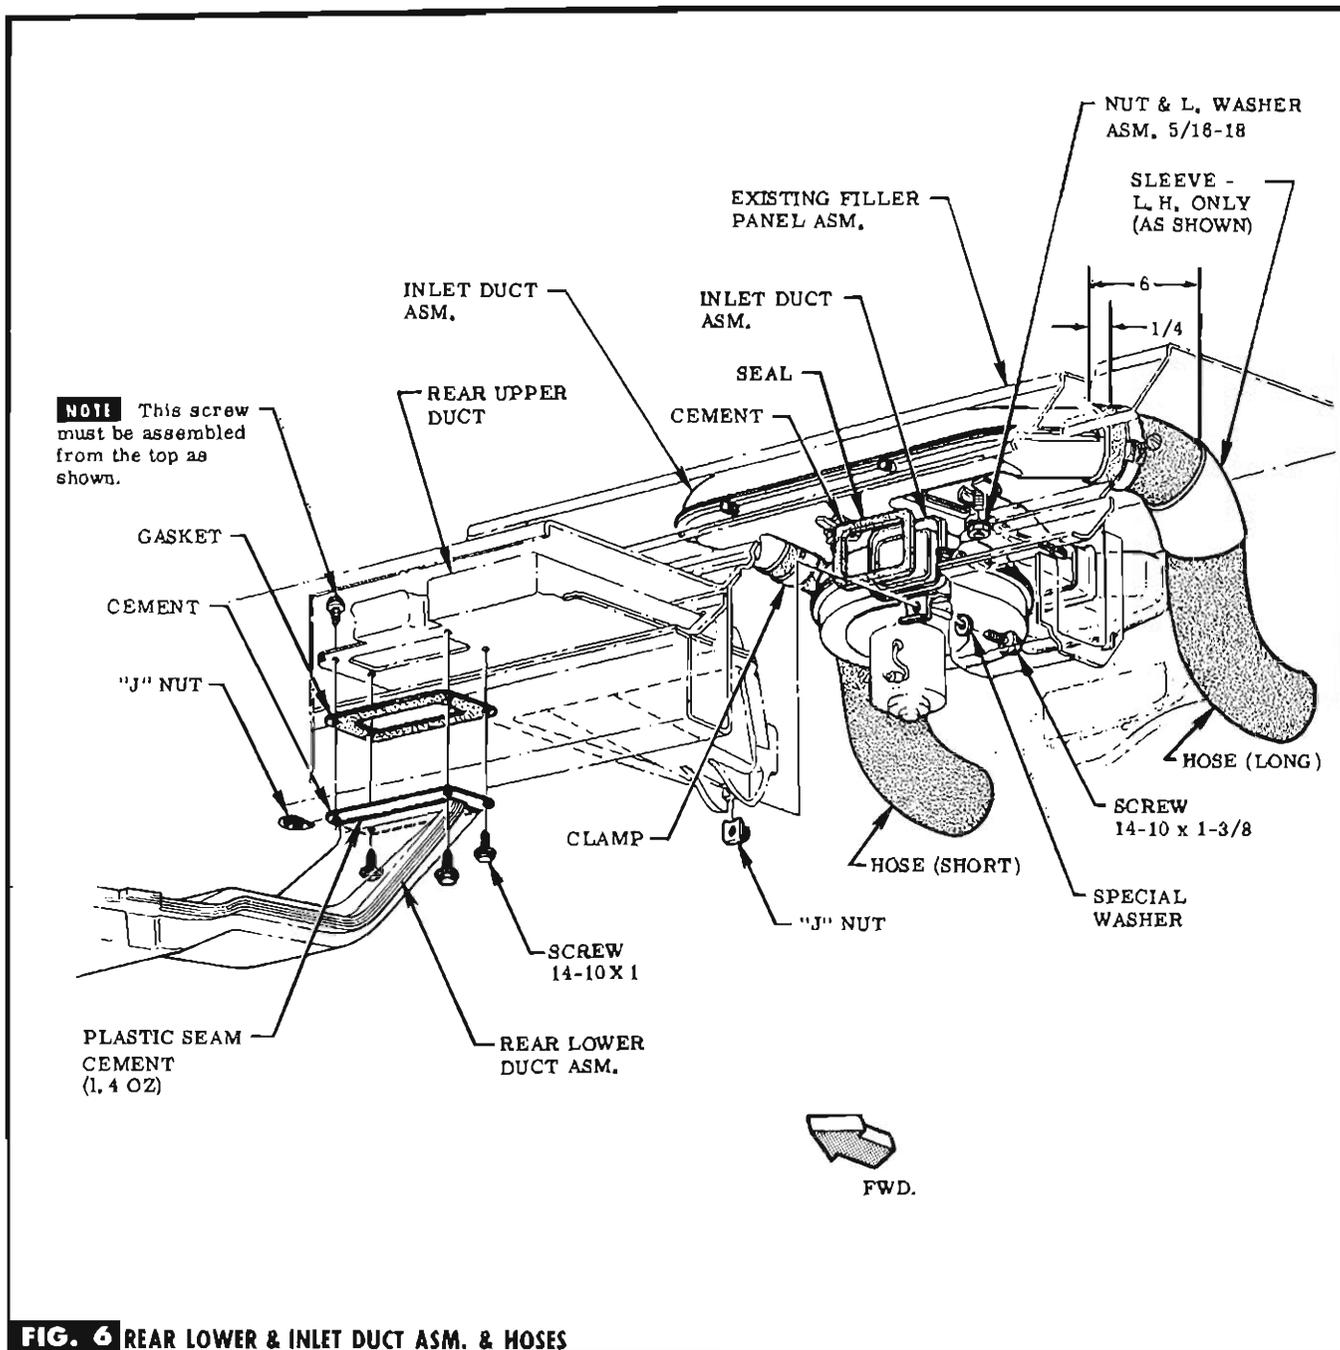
REAR LOWER & INLET DUCT ASM. & HOSES
